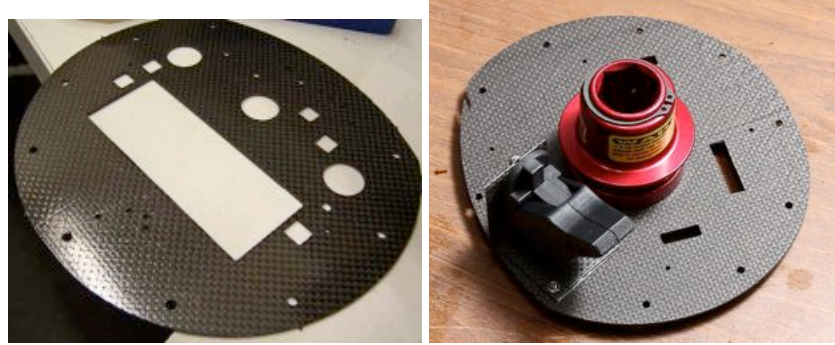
Photograph of completed steering wheel front cover (left image) and back cover (right image). The quick release and accelerator pedal are mounted on the back cover.
